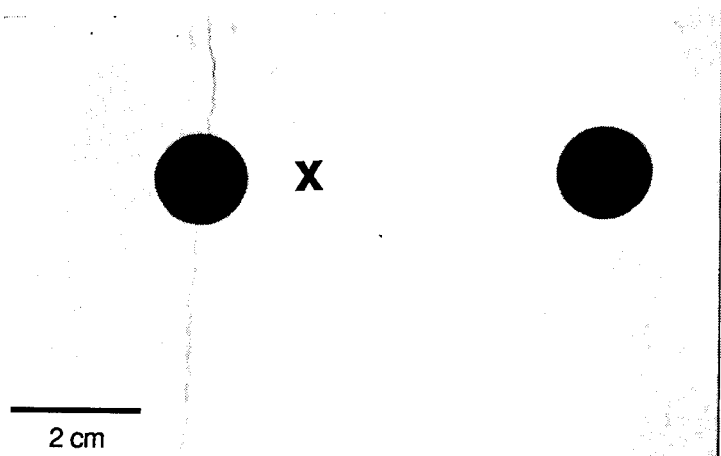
The bottom view of the stripped Al trunnion casting showing hair-line cracks adjacent to the bolt hole x.
